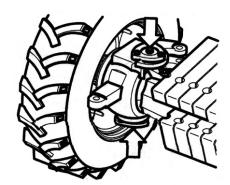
Adjustment on oil level of front axle casing Fig.5-26 Lubrication of front axle master pin
